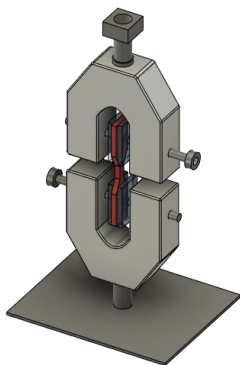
Universal testing machine configured for tensile testing (clamping detail).
